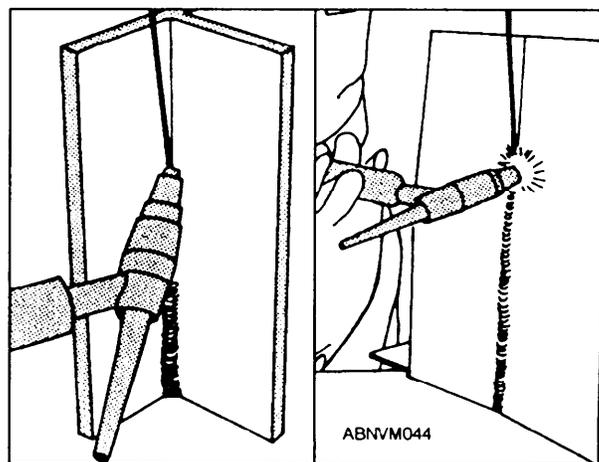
Butt and fillet welds made in the vertical position.
